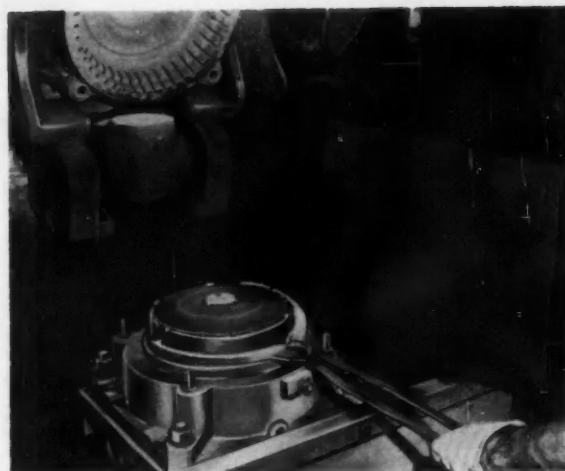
Loading a bonded cast iron brake drum liner into lower half of a permanent mold.
